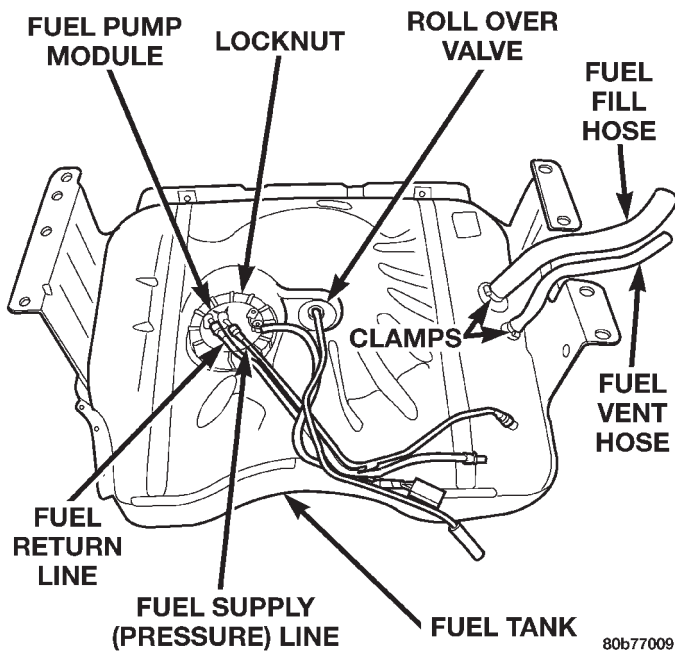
Top View of Fuel Tank and Fuel Pump Module
